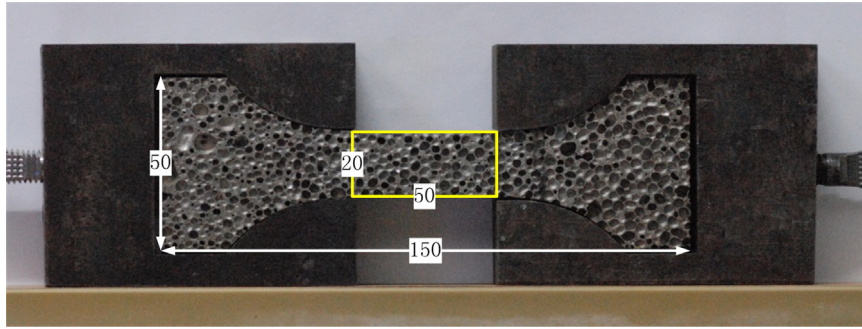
The specimen with dimensions and the specially designed fixtures (mm).
